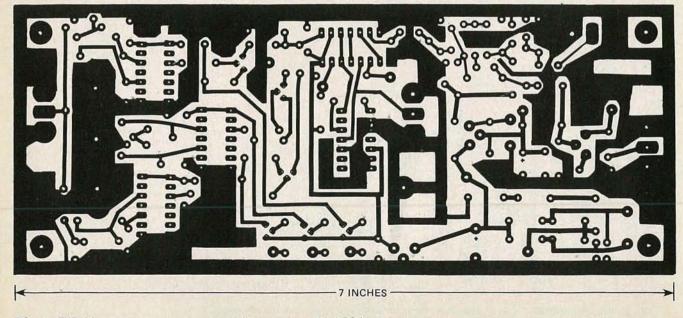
THE COMPLEX VCO circuit can be built on a single-sided PC board using only three jumpers.
